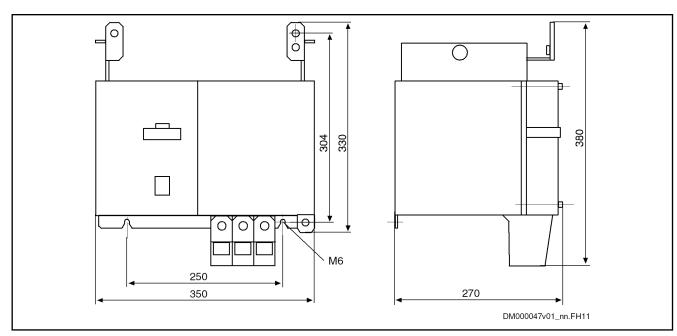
Mains filter dimensions HNK01.1A-A075-E0146
